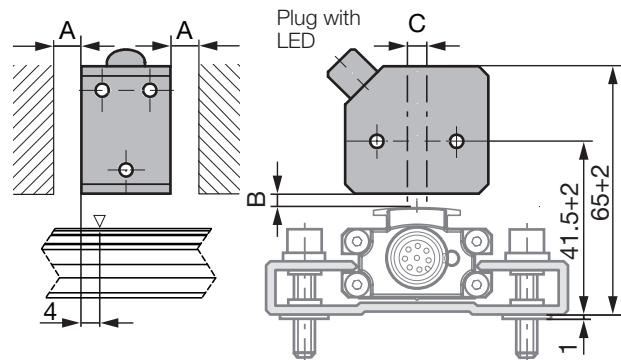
Dimensions and distances with BTL5-P-4500-1 electromagnet (24 V/100 mA)
